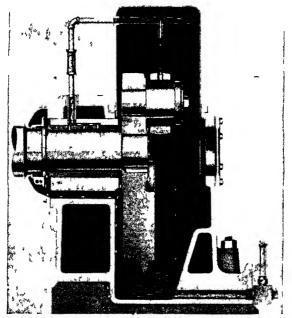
An overhead basin supplies oil to the main bearing and crank
